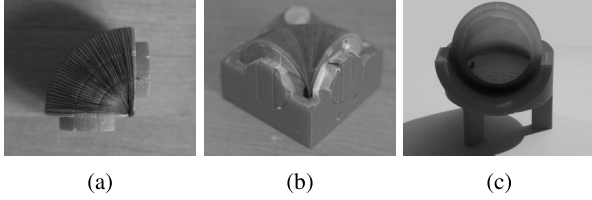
Manufacturing process: a) reinforcement deployment, b) external layer of active part molding, c) closing both ends of the actuator.
